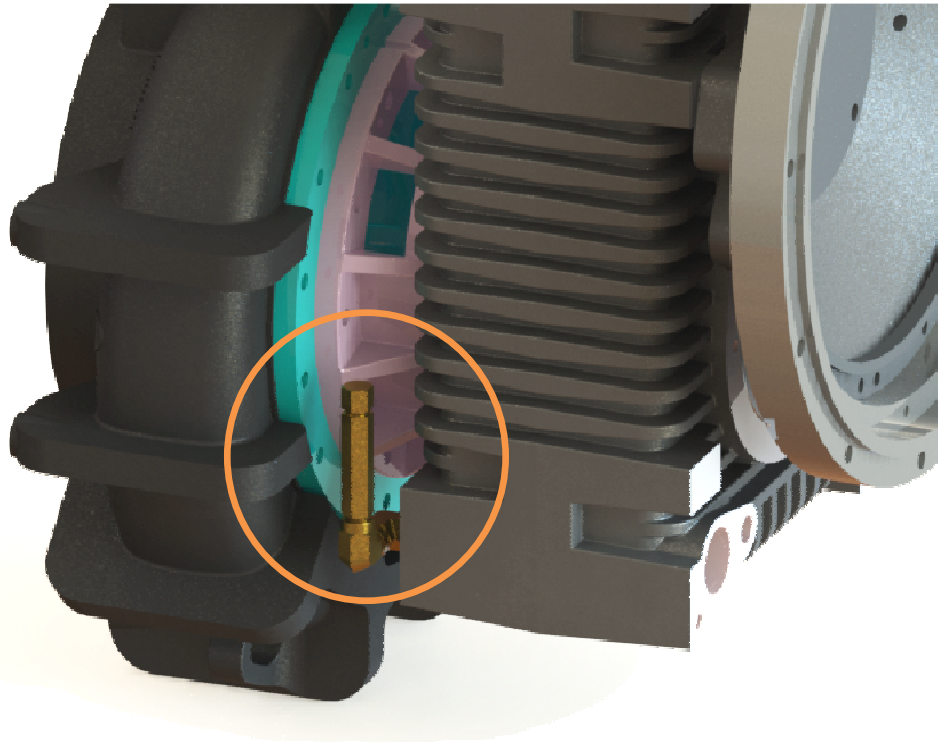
Oil Fill Level Assembly - Retrofit Kit Install Check
